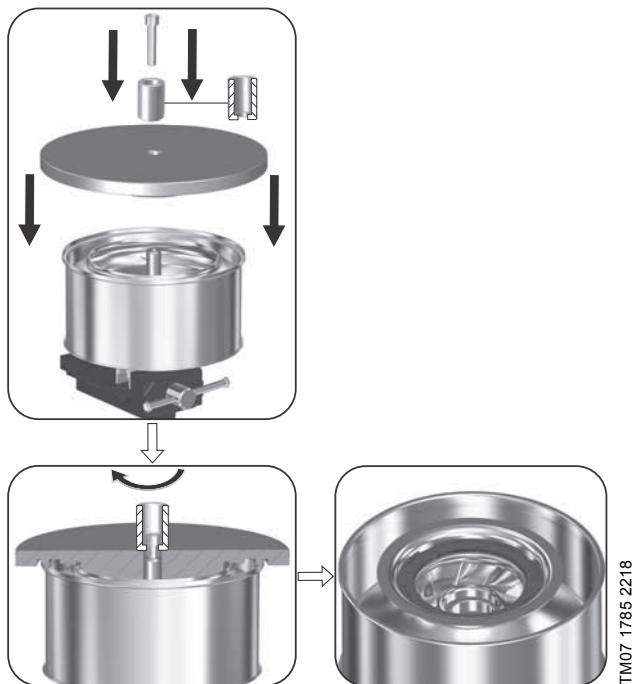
Neck ring, neck-ring retainer and chamber positioned in service tool L.
